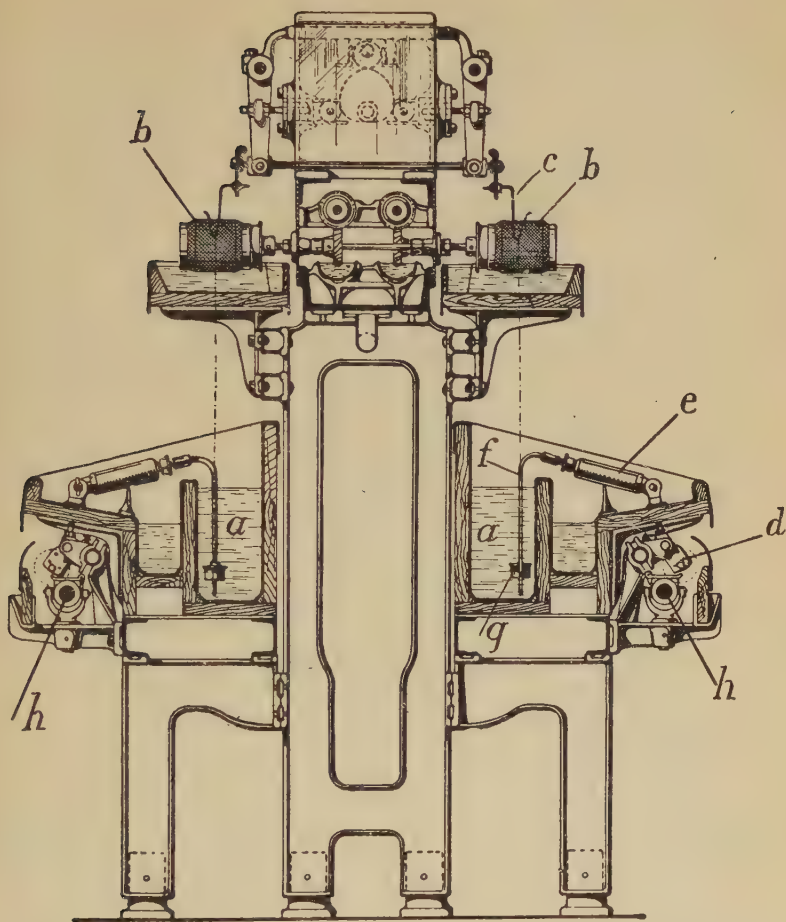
Bobbin Spinning Machine. (C. G. Haubold A. G., Chemnitz, Germany.)
